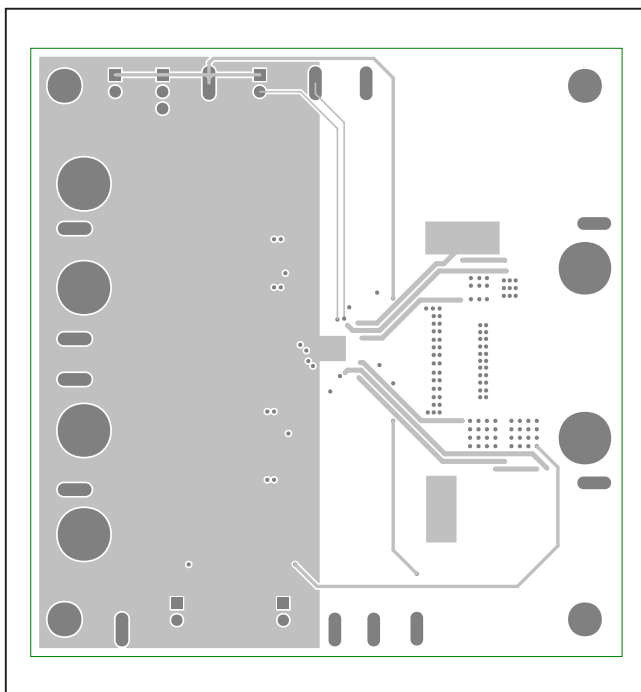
MAX17548 EV Kit PCB Layout—Inner Layer 1
